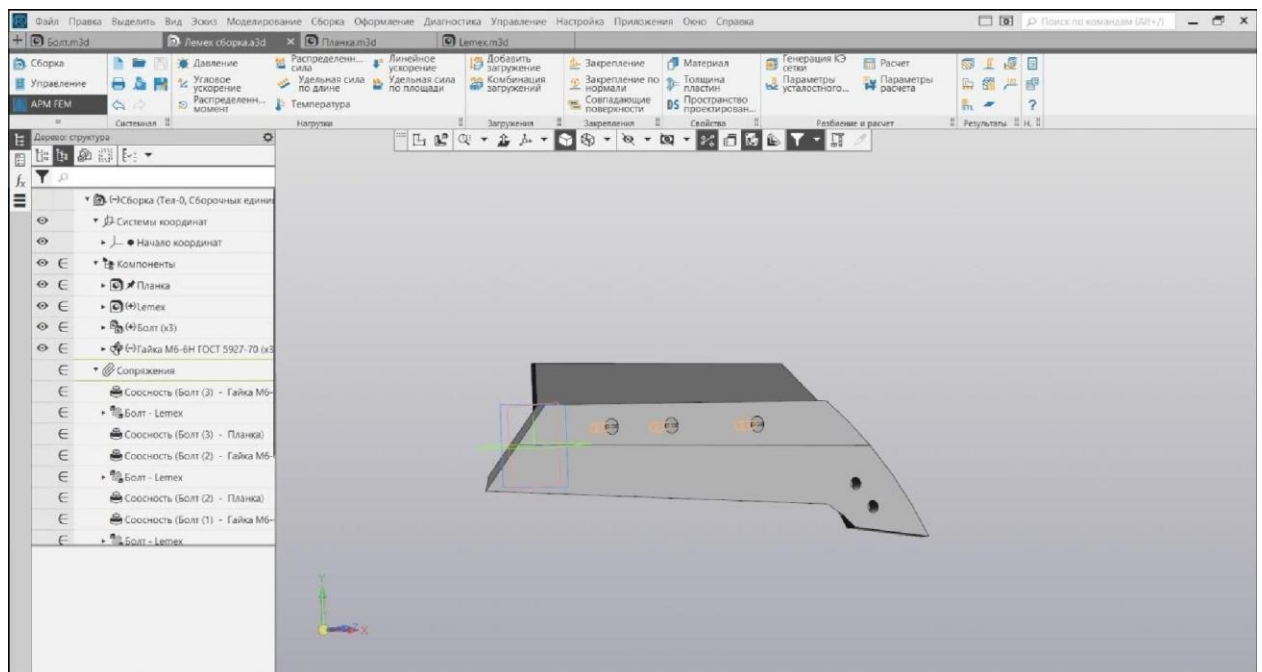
Lemex detail and three-dimensional model of its assembly unit
